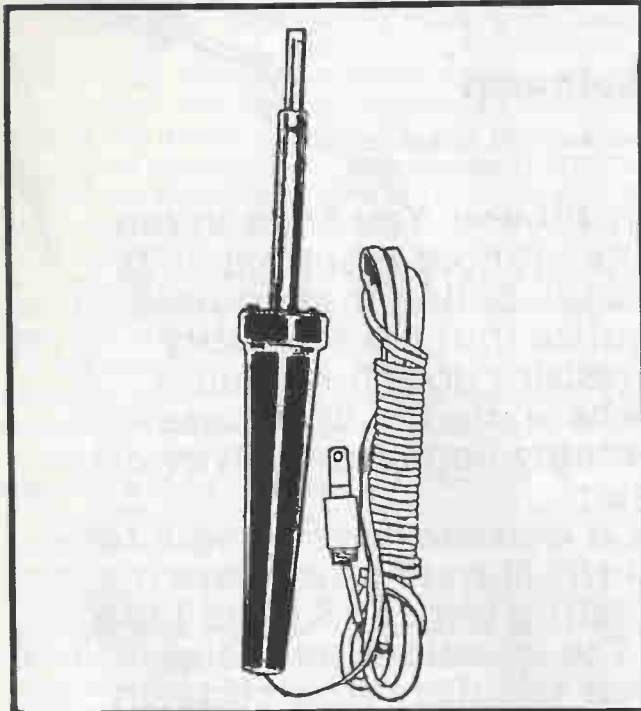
For all electronic work, a Soldering Iron or Pencil with a wattage of about 25 to 45 W should be purchased. Even with these low heat generating devices. Heat Sinks should still be used on ICs, Transistors and other components that can be destroyed by excessive heat.
